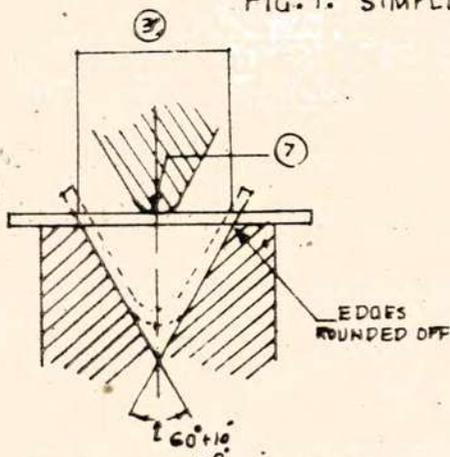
BEND TEST THROUGH AN ANGLE OF 120°
